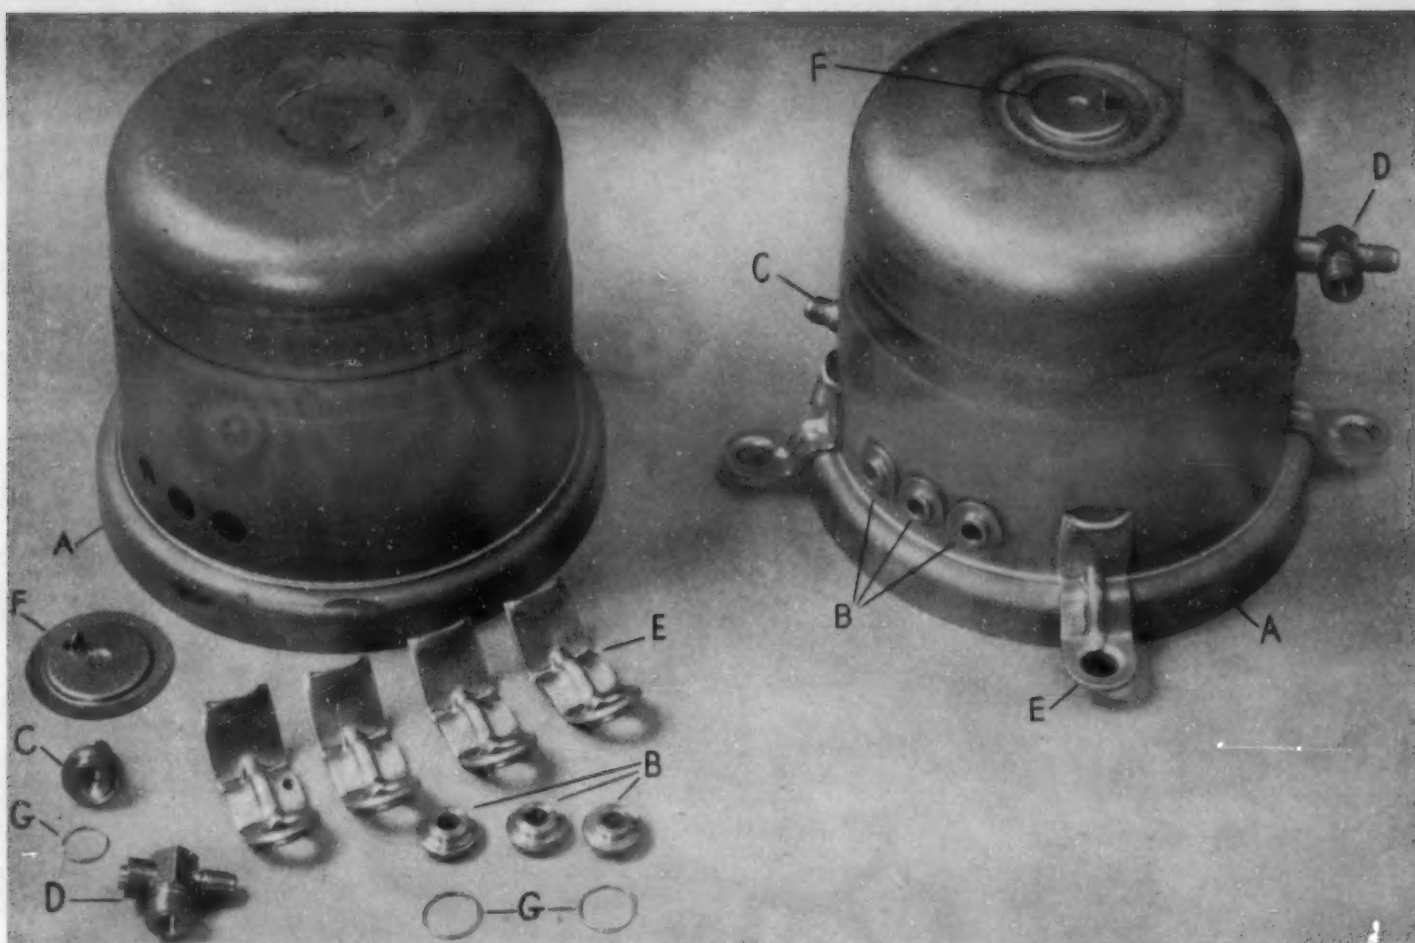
Component parts for dome assembly (left) and copper-brazed dome assembly (right).
